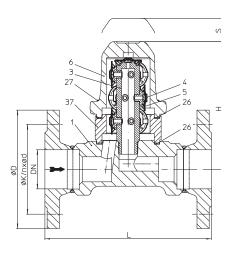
1....10K2 (DN40-50) with 10 capsules, with flanges
